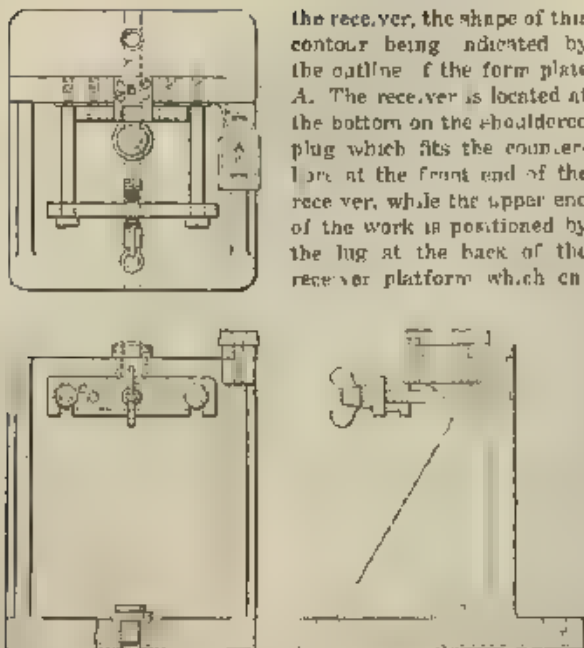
FIXTURE FOR SLOTTING END OF RECEIVER
